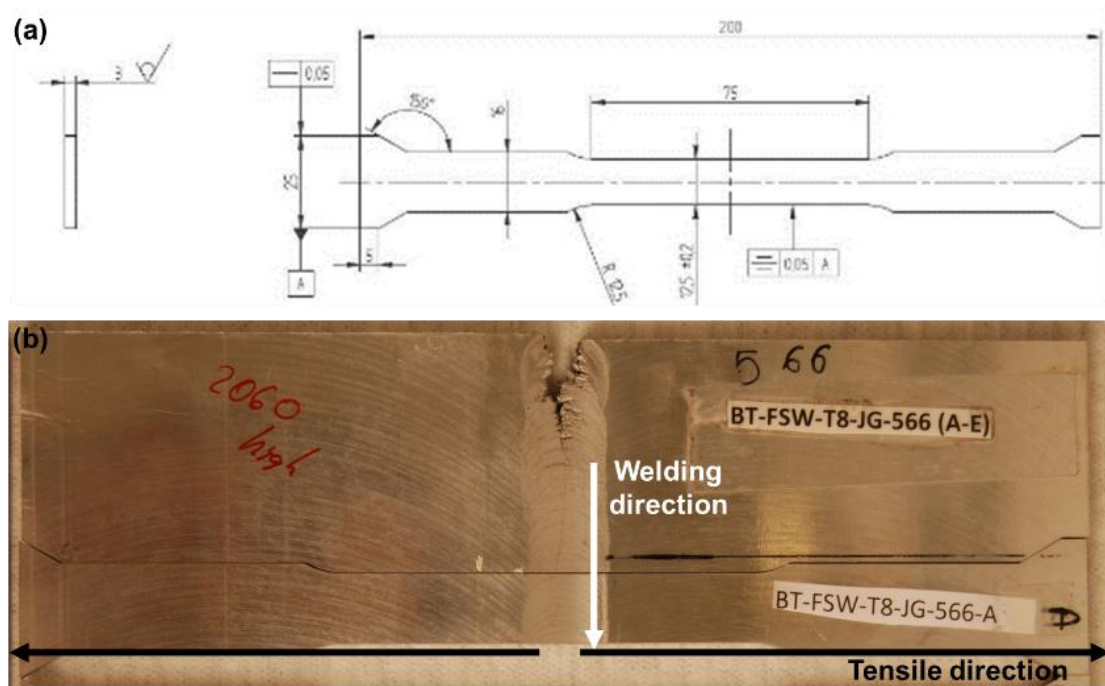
Tensile sample (a) dimensions and (b) test and welding directions. *Image (a) is a courtesy of Jannik Goebel at Helmholtz-Zentrum Geesthacht.
